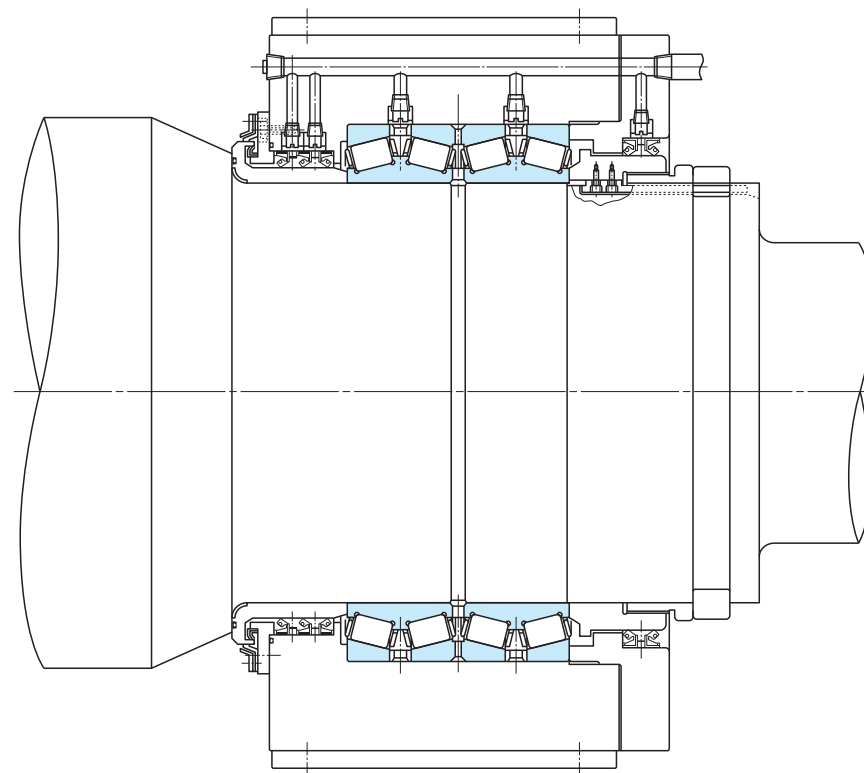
Work Roll Chock Assembly, Steel Strip Rolling Mill
